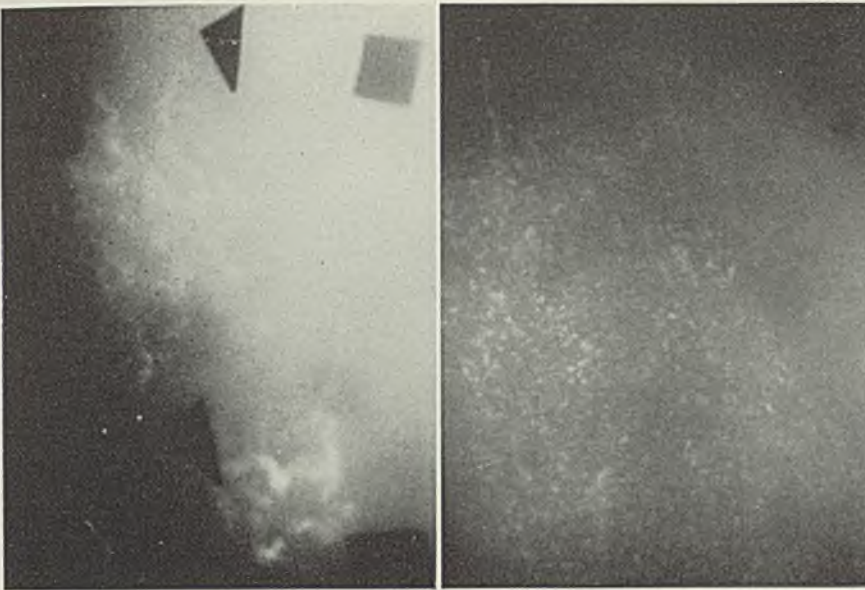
(left)—Double exposure exograph of shrinkage in cast steel. Fig. 6b (right)—Exograph of same section after repair by welding
